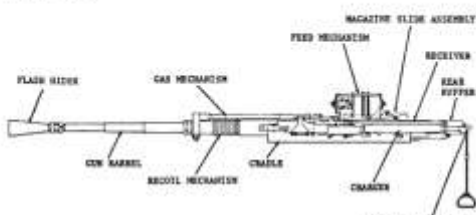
20mm Machine Gun Mk 16 Mod 5 With Charger and Feed Mechanism
